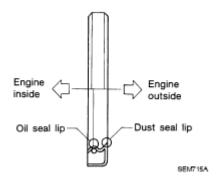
Applying Engine Oil To Both Oil Seal Lip And Dust Seal Lip Courtesy of NISSAN MOTOR CO., U.S.A.
